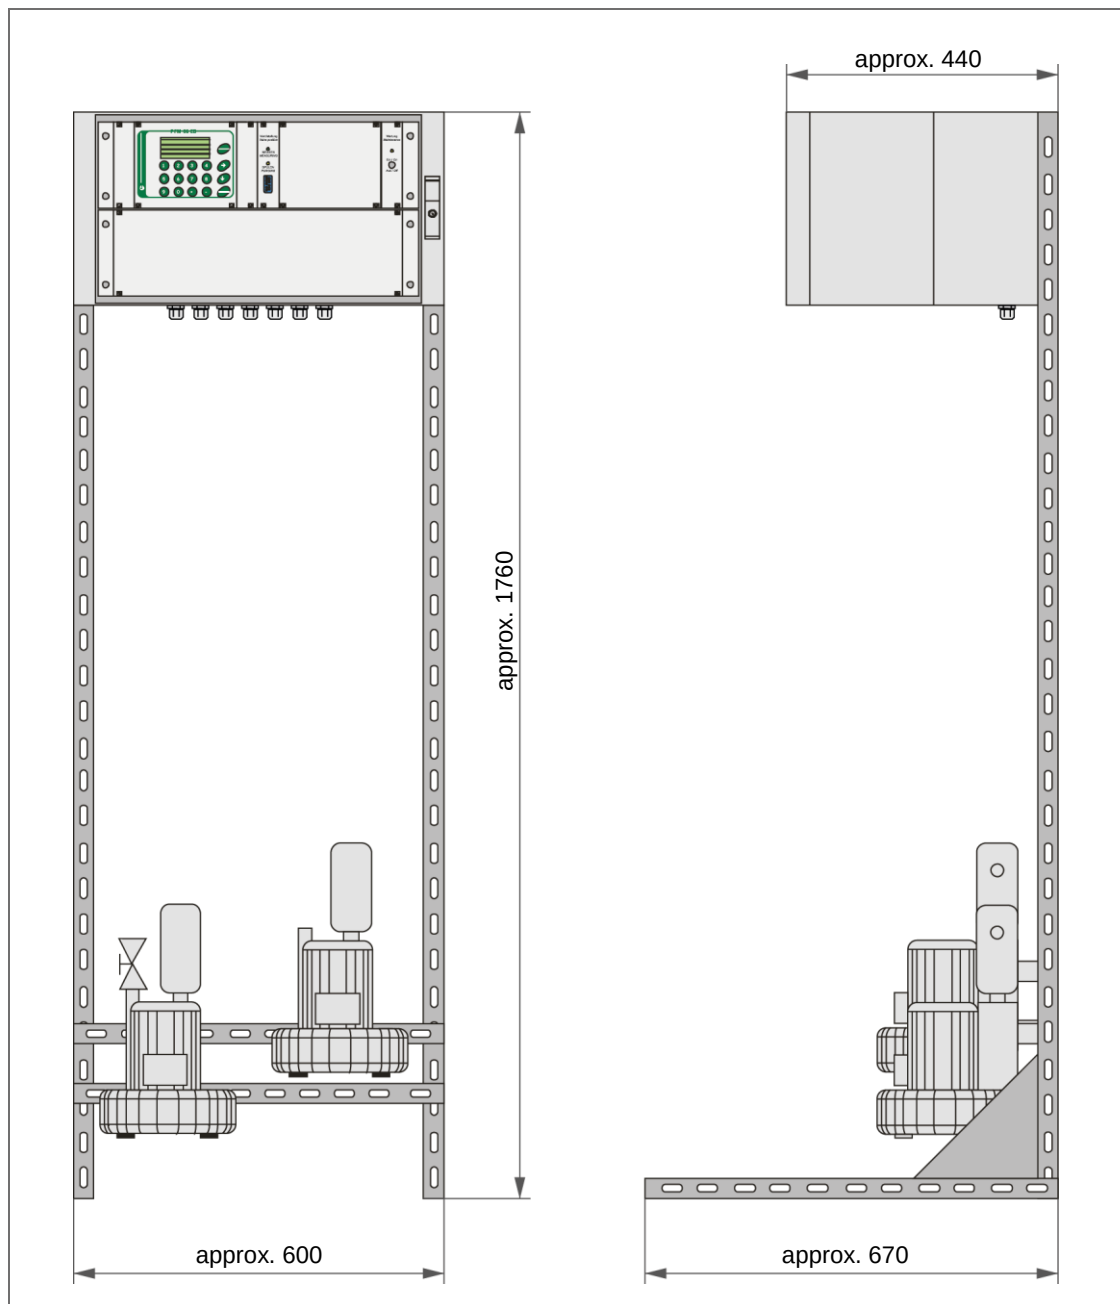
Dimensions of the profile rack, incl. operating device and blowers (specifications in mm)
